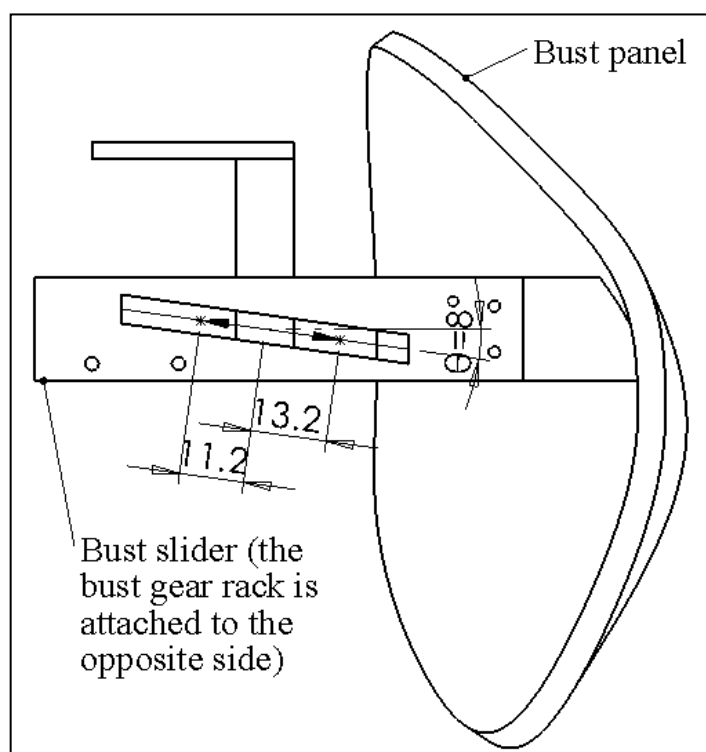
Side view of the right bust slider and panel, the movement of left bust panel is identical. All the linear dimensions are in mm.
